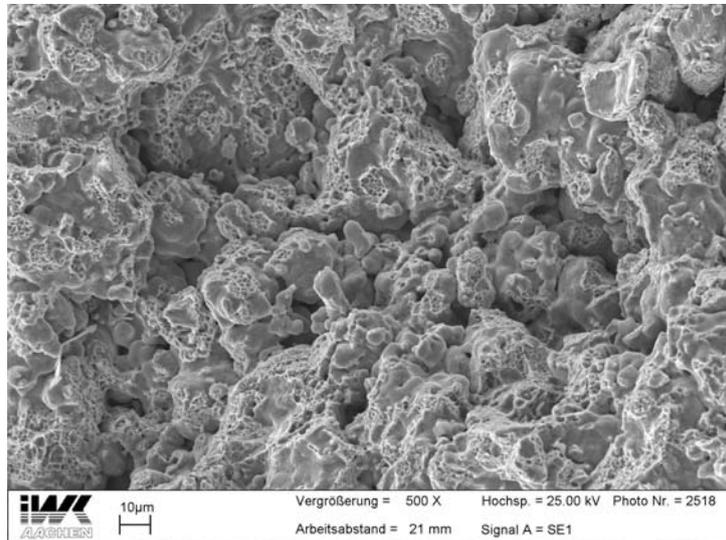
Fracture surface from the final fracture of pulsating fatigue specimens of the material Distaloy AE+0,5 %C+0,03 %B
